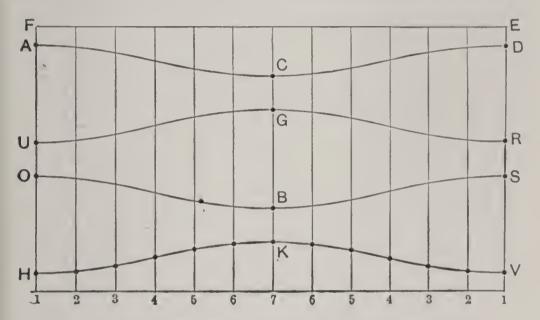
Complete Set of Patterns for Five-piece Elbow.
